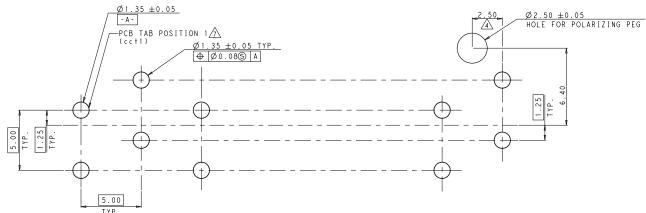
Recommend Pcb Layout - Solder Side Pcb 1.5±0.2 Thick
